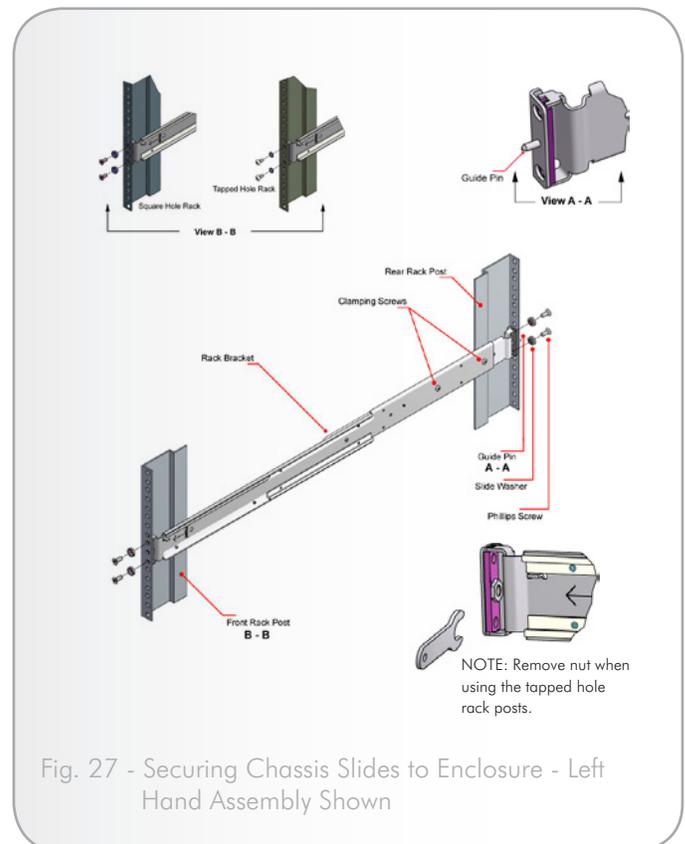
Securing Chassis Slides to Enclosure - Left Hand Assembly Shown
